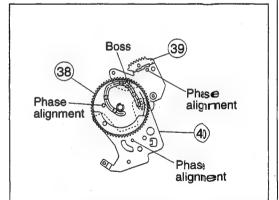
(b) Removing the Clutch Lock Lever Assembly (40)
